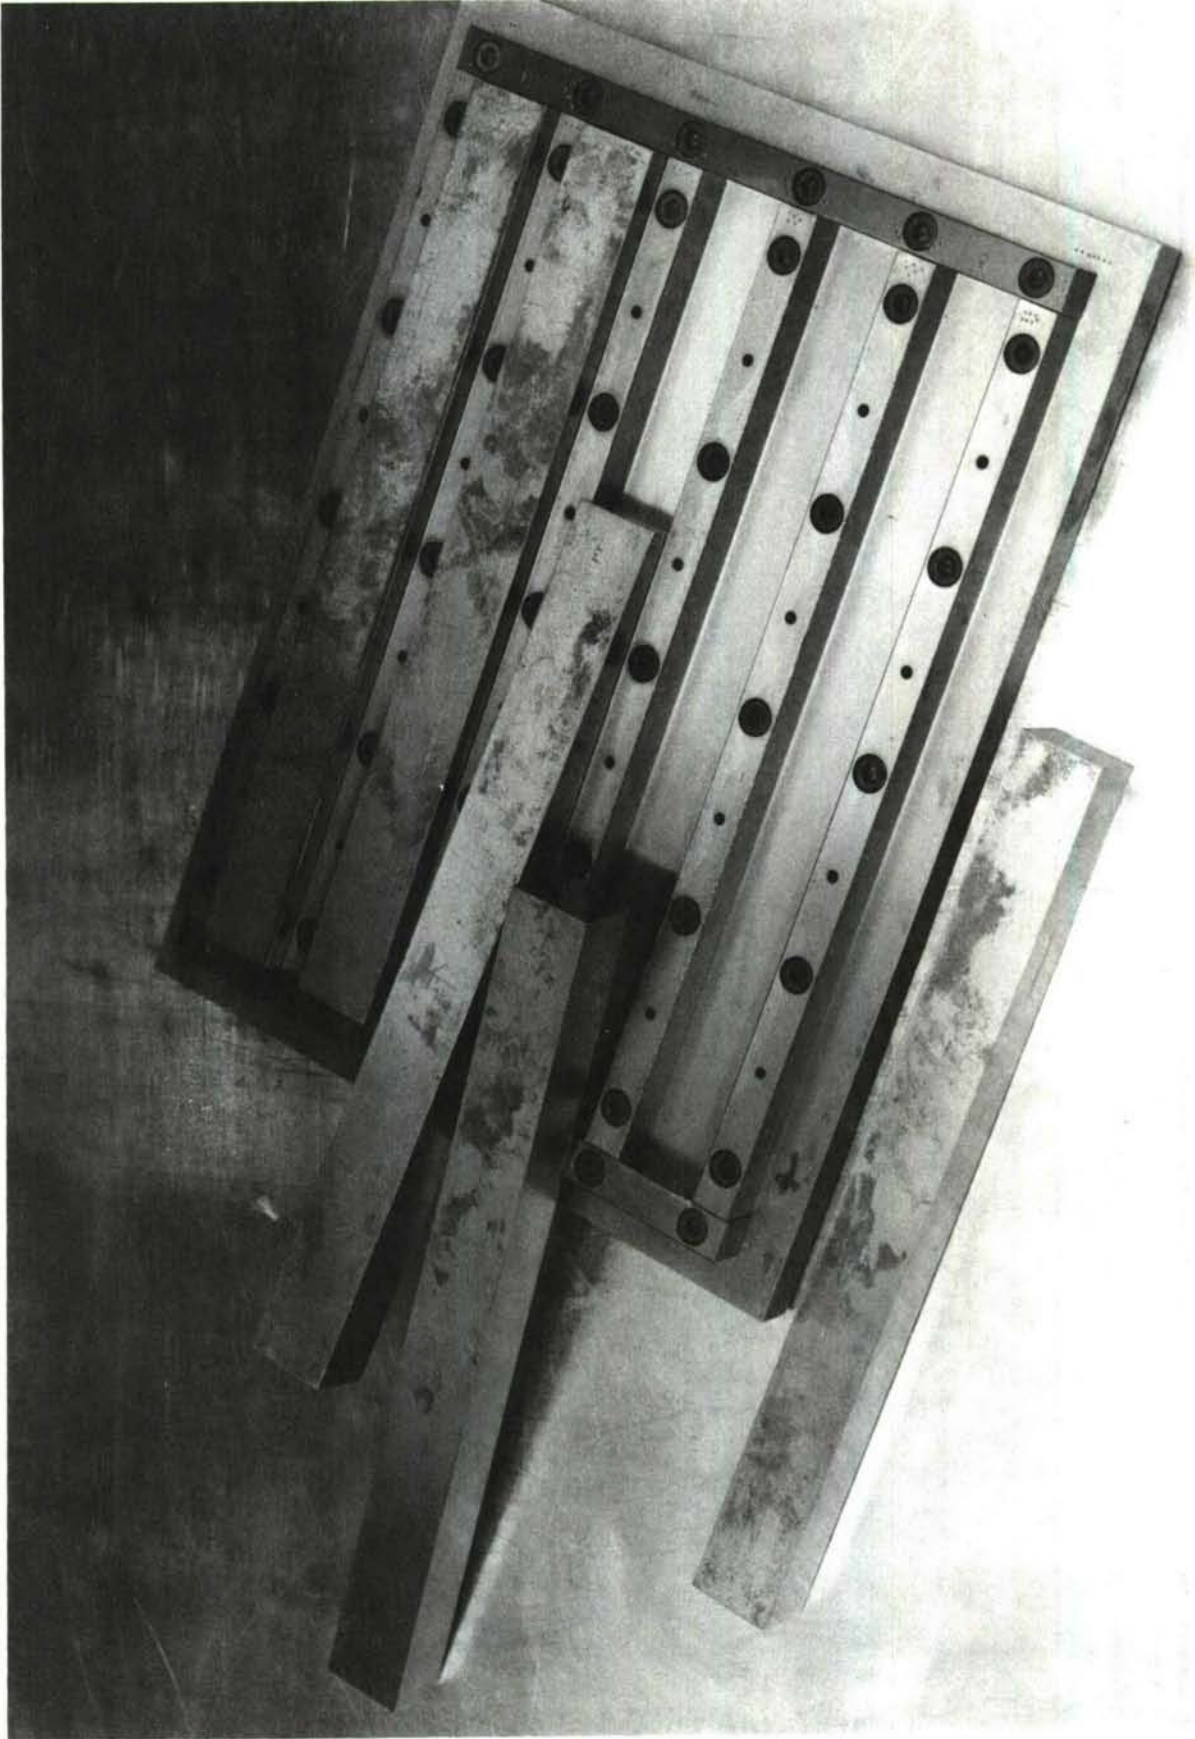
FIVE-SPECIMEN MOLD CAVITY
